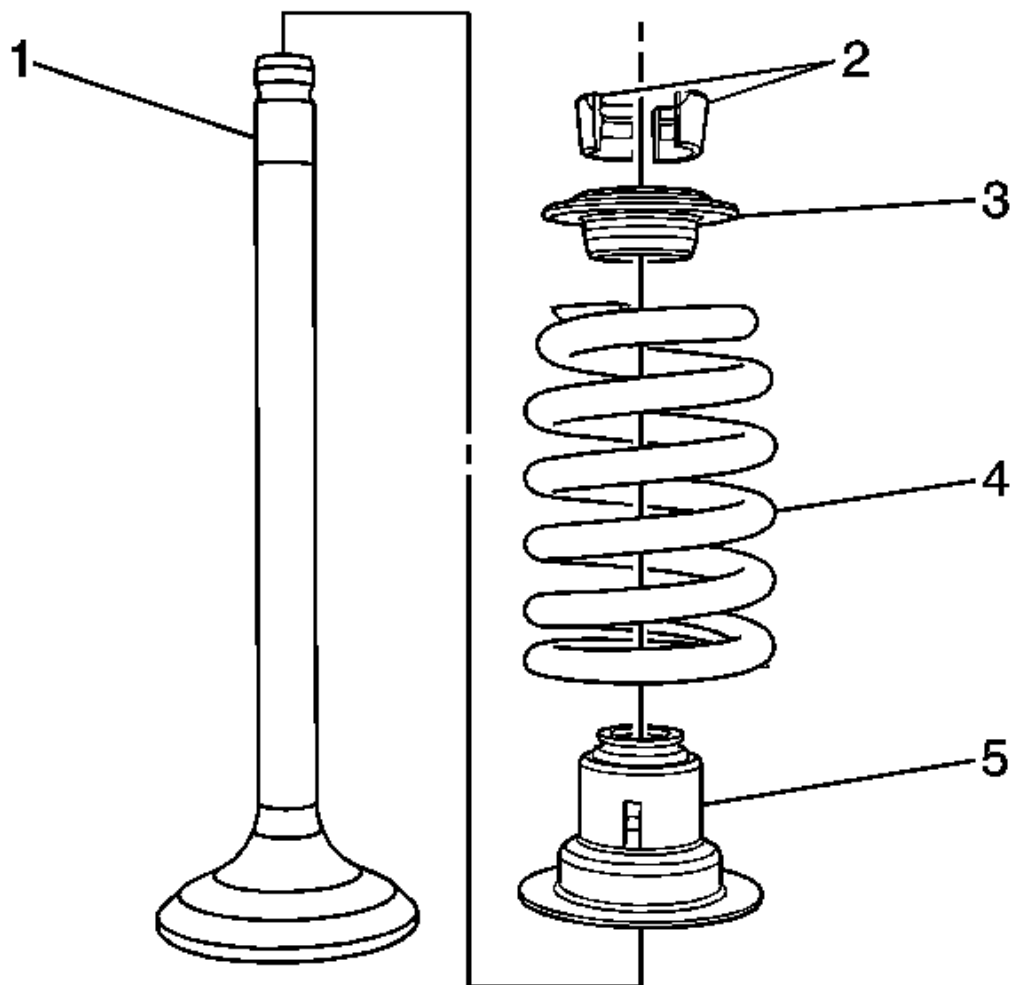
View Of Valve, Keys, Spring, Spring Cap & Valve Stem Oil Seal
